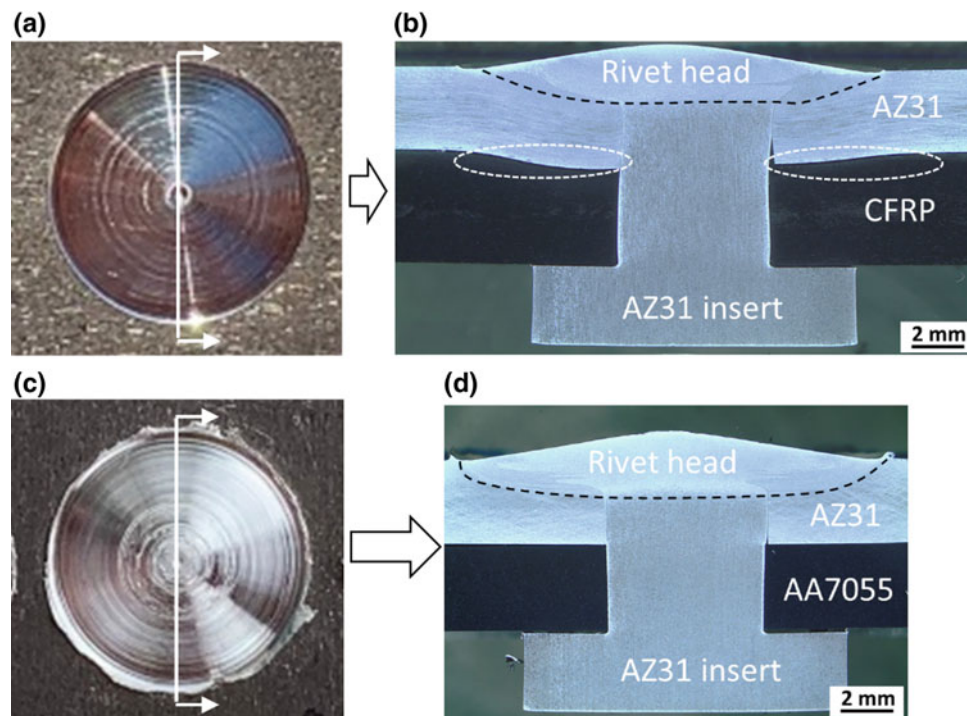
a Rivet head top view and b cross-section of riveted AZ31/CFRP sheets with AZ31 insert (Tool #1), and c rivet head surface and d cross-section of riveted AZ31/AA7055 sheets with AZ31 insert (Tool #1). Black dotted lines are approximate representations of
